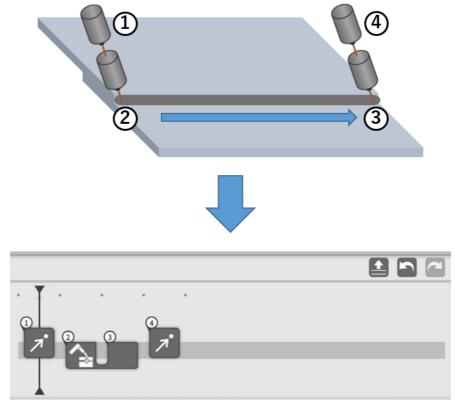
(a) An example of arc application 1: an example of liner welding
